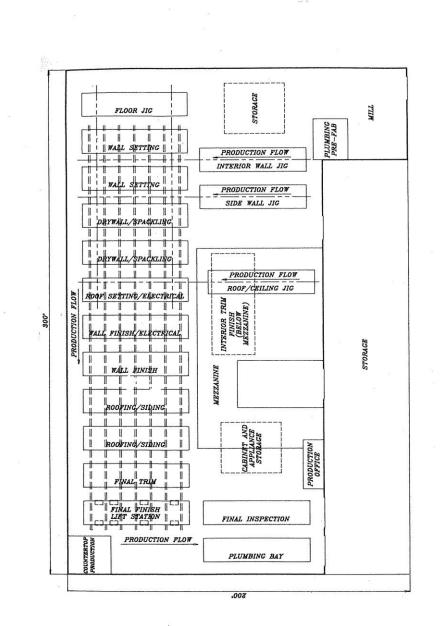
Plan view of Penn Lyon facility showing process work stations.
